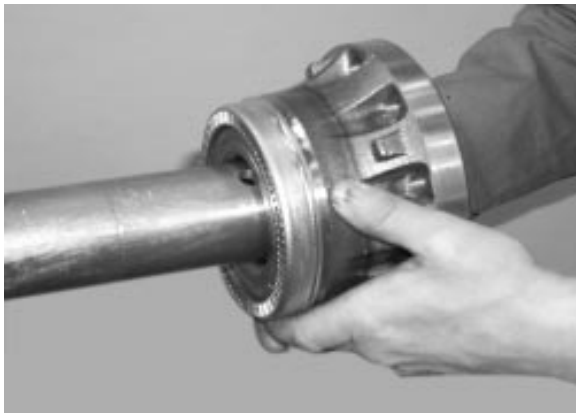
SLIP UNITIZED HUB BEARING OVER SPINDLE
